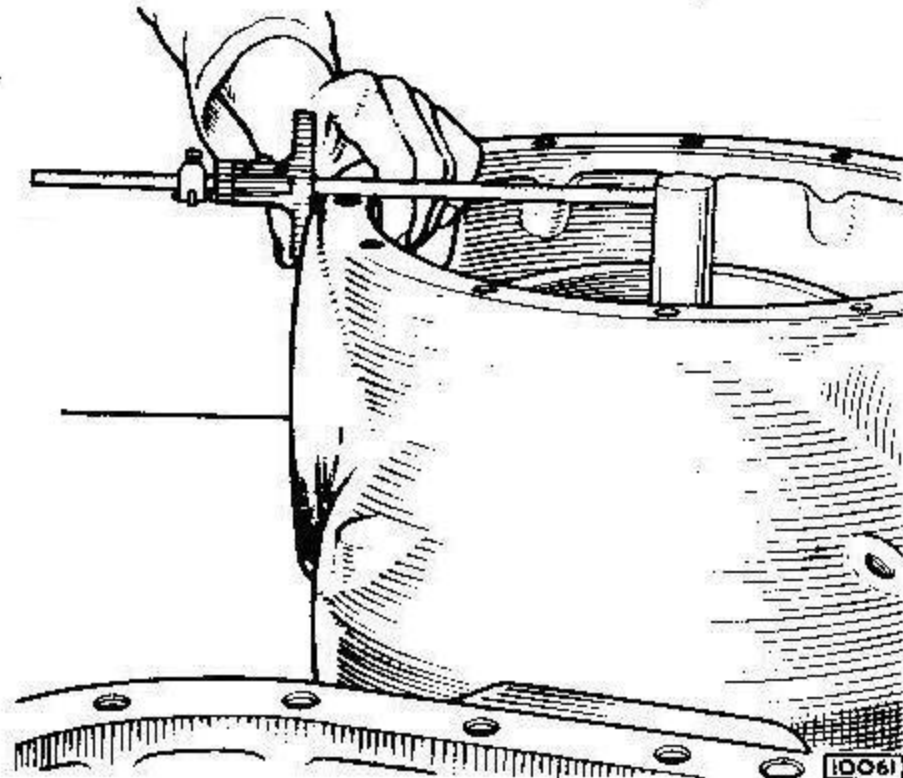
Checking the dimension from the nose piece mounting face to the centre of the differential outer bearing race housing
